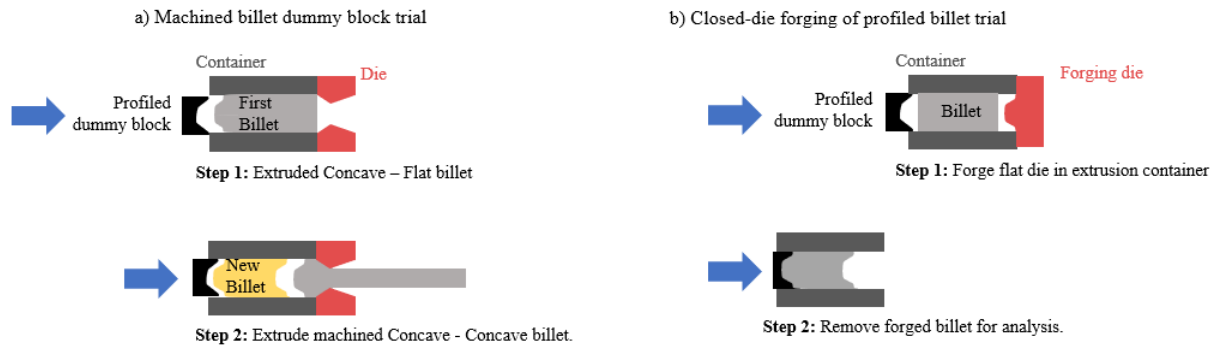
Outline of (a) machined billet dummy block trial, and (b) closed-die forging of profiled billet trial.
